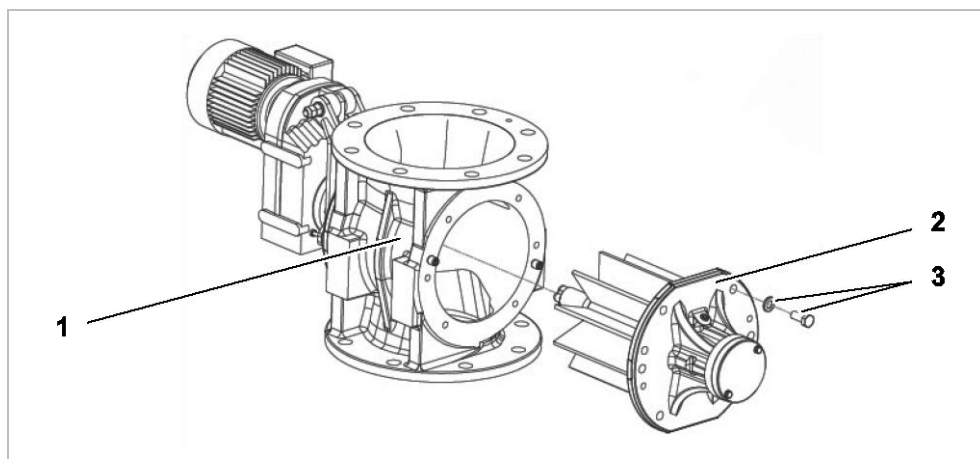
Unit (.2 /.3 /.4 /.5 design) and ZZB valve
